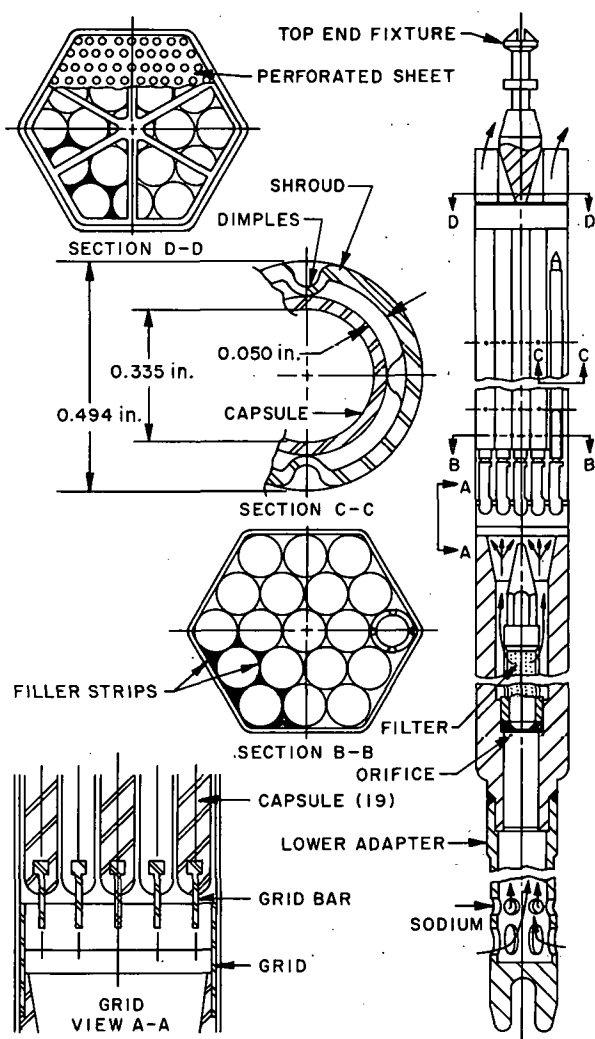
Sectional views of Mark-A irradiation test subassembly
